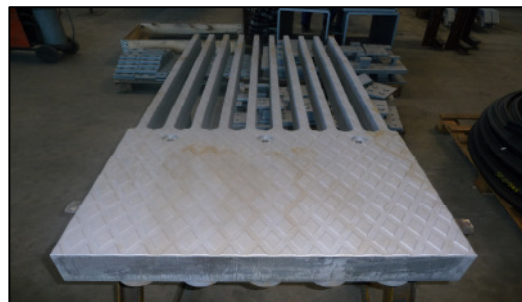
One of two test pieces created to confirm fabrication method for sliding finger plates.
